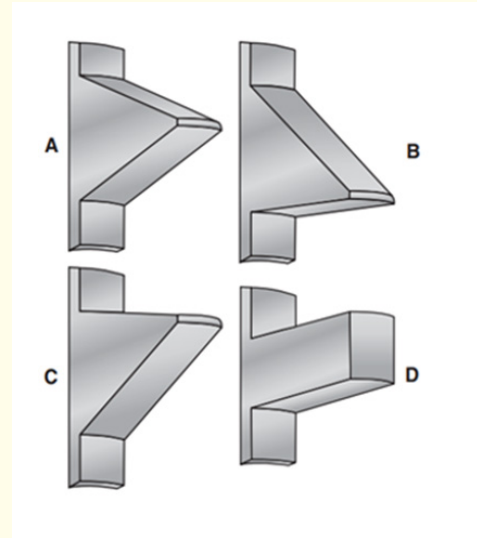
The four basic thread shapes for implant design include: (A) V-thread, (B) buttress thread, (C) reverse buttress thread, and (D) square thread.
